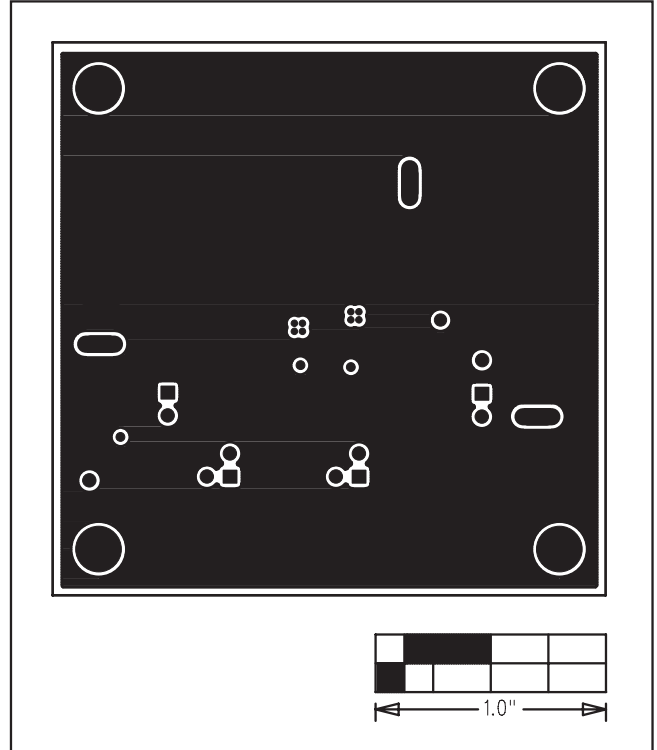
MAX17083 EV Kit PCB Layout—PGND Layer 3
